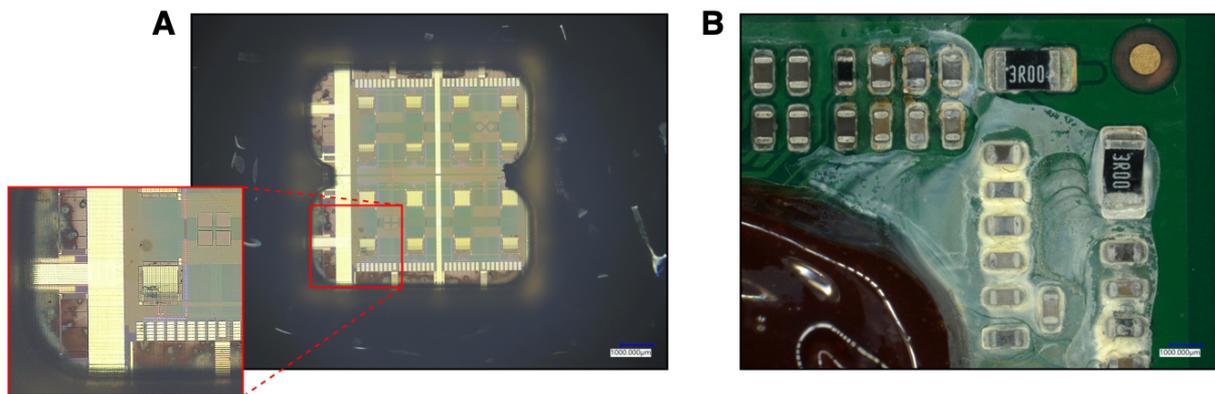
Microscope pictures of [A] corrosion on the chip active area, with magnification on corrosion effects, and [B] corrosion on the PCB electrical components.
